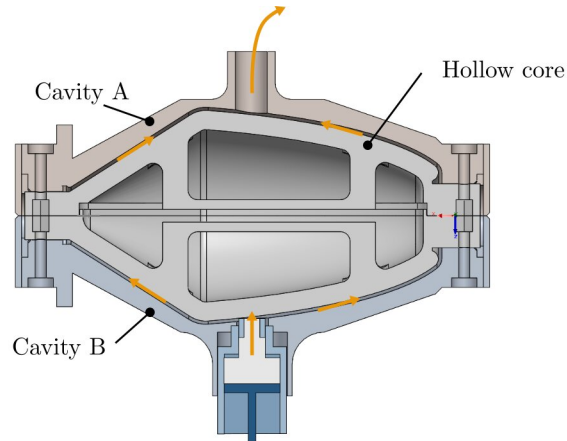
Cut view of the moulding assembly used to fabricate the main membrane. The orange arrows indicate the paths of the silicone rubber.
